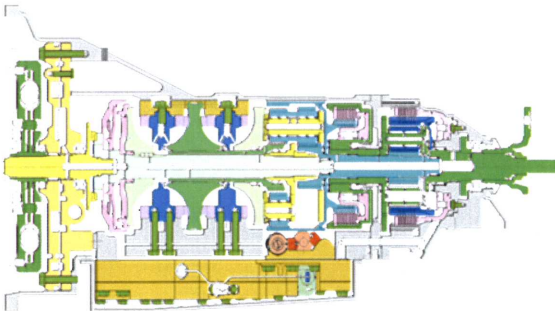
Cross-sectional view of Infinitely Variable Transmission
